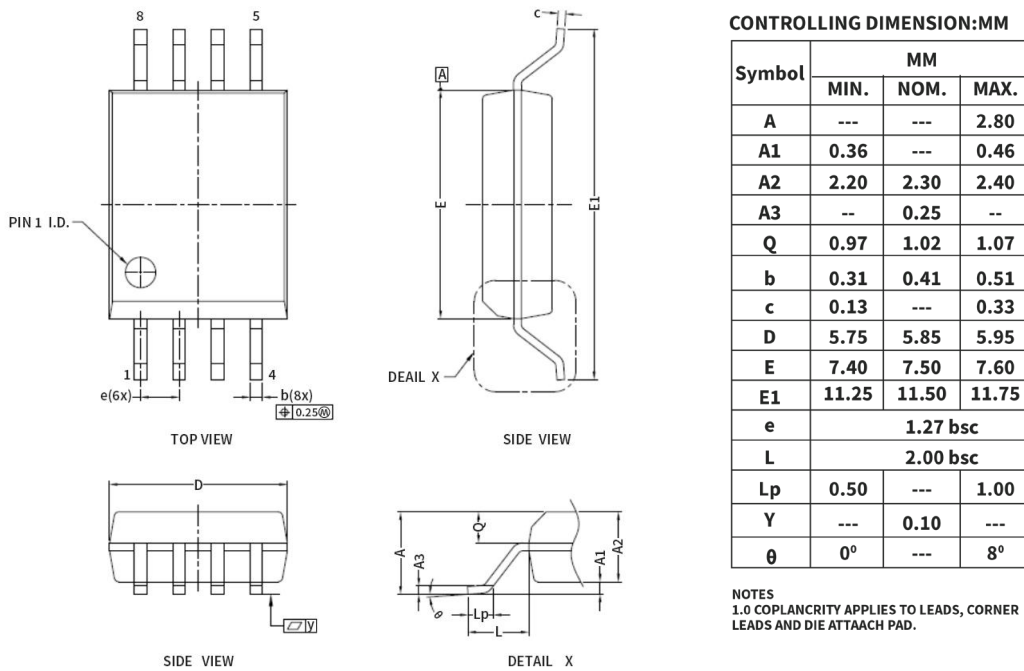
SOP8(300mil) Package Shape and Dimension in millimeters
